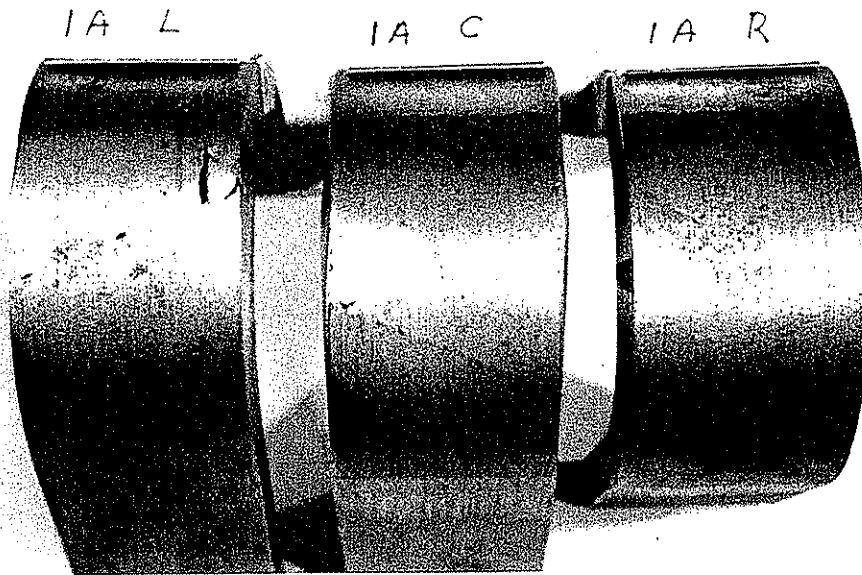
Side Bend Test Specimens from Flange Splice 1A.
